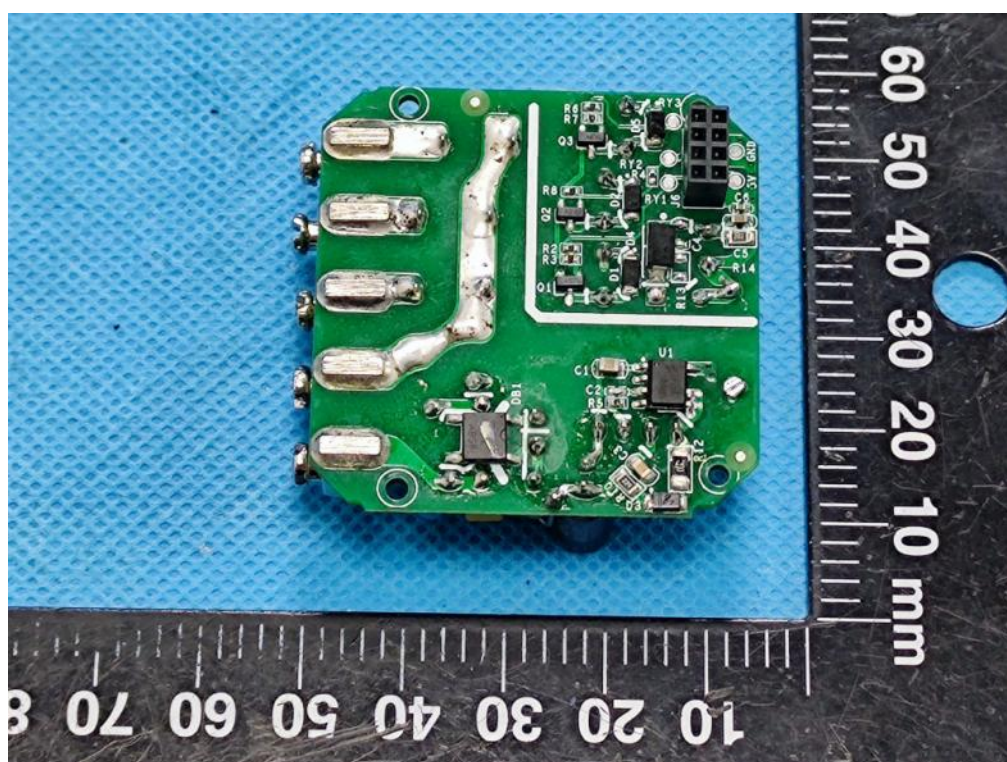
PCB bottom view of power baard(Model: M5-3C-80)
